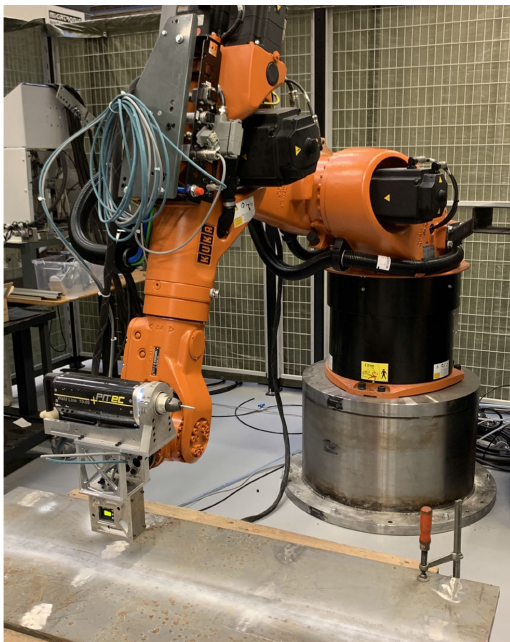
Scanning of the weld using an industrial robot. This is done before and after the treatment
